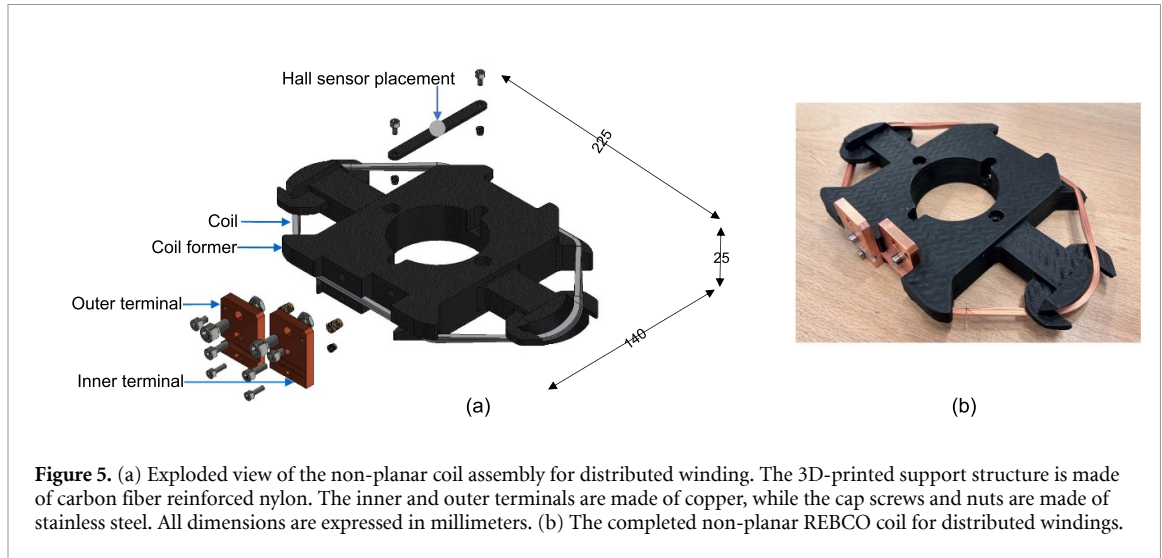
(a) Exploded view of the non-planar coil assembly for distributed winding. The 3D-printed support structure is made of carbon fiber reinforced nylon. The inner and outer terminals are made of copper, while the cap screws and nuts are made of stainless steel. All dimensions are expressed in millimeters. (b) The completed non-planar REBCO coil for distributed windings.
